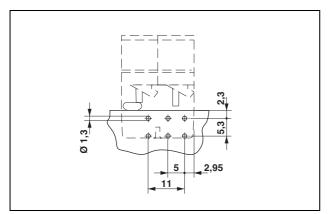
Drilling diagram of header HSCH 2,5-2U-2220 9005
